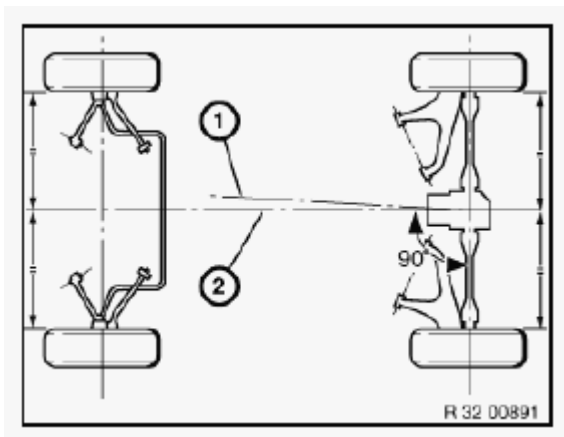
Geometrical Drive Axis/Symmetrical Axis
